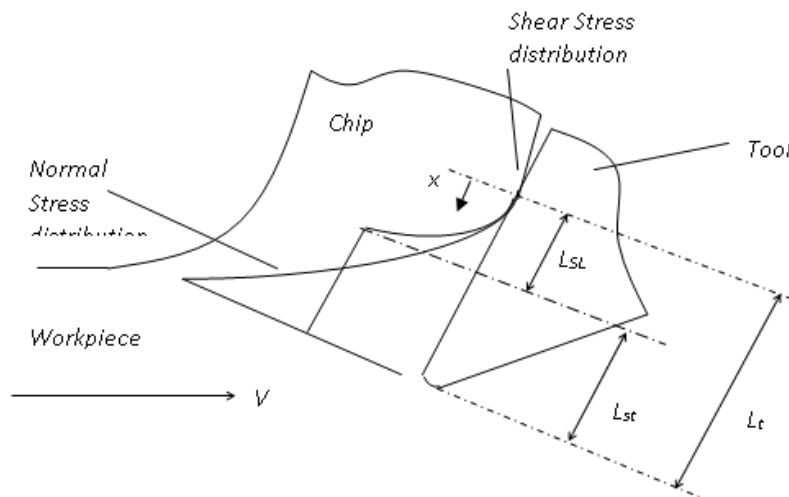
Model of Chip and Cutting Tool Friction in Orthogonal Cutting (After: [4])
